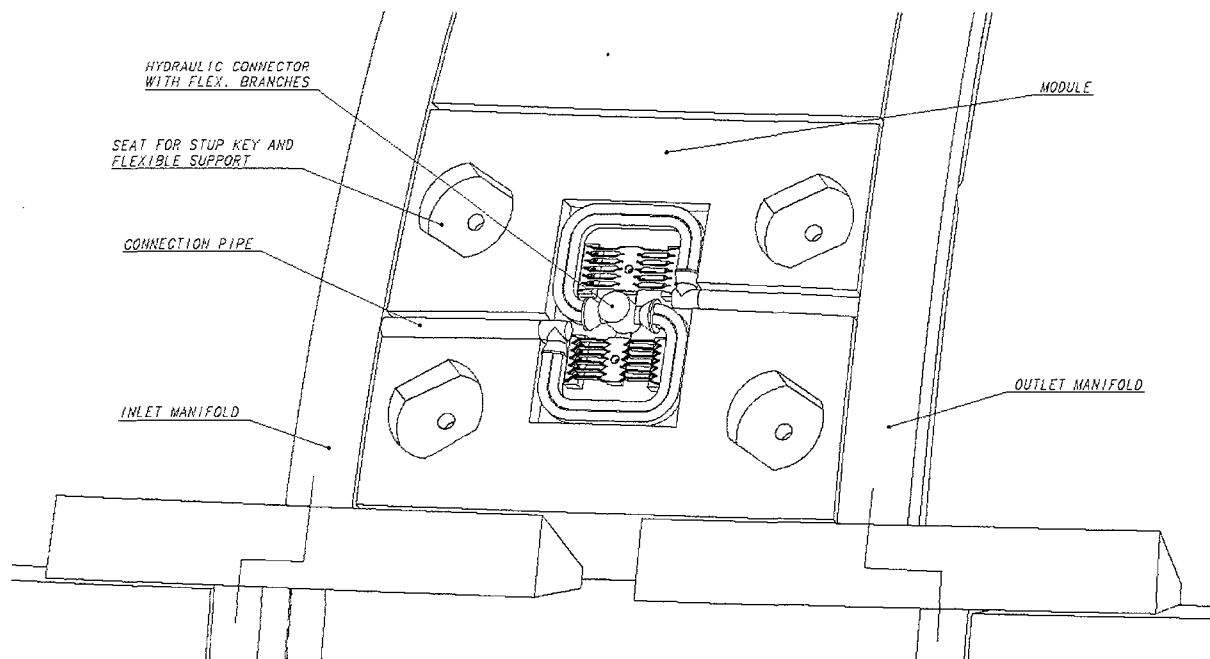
Typical attachment of the outboard blanket modules.
